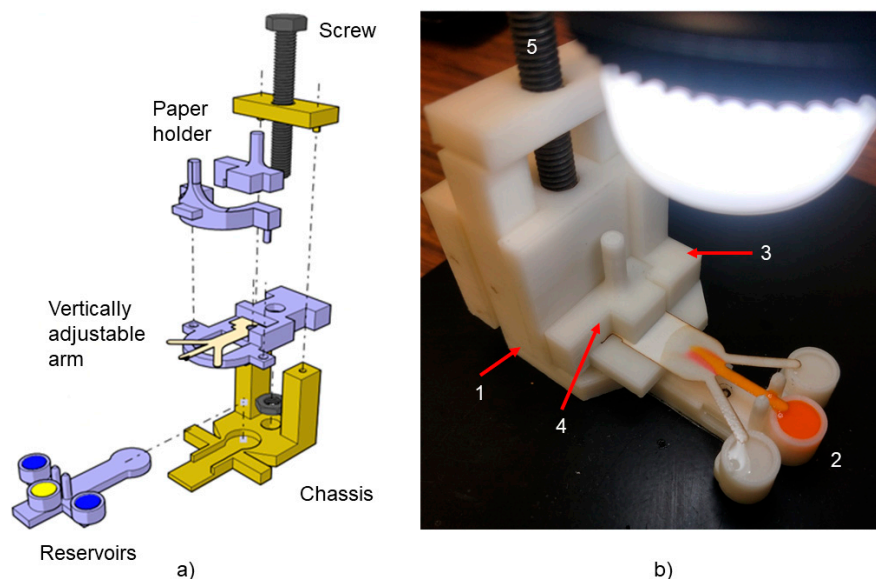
3D-printed support. (a) Assembly of the different parts. (b) Picture of a test under performance.
